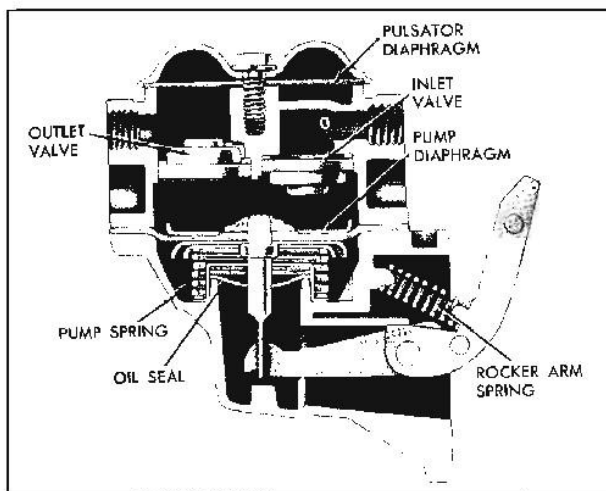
B-102 Schematic View of Fuel Pump 6 Cyl.
